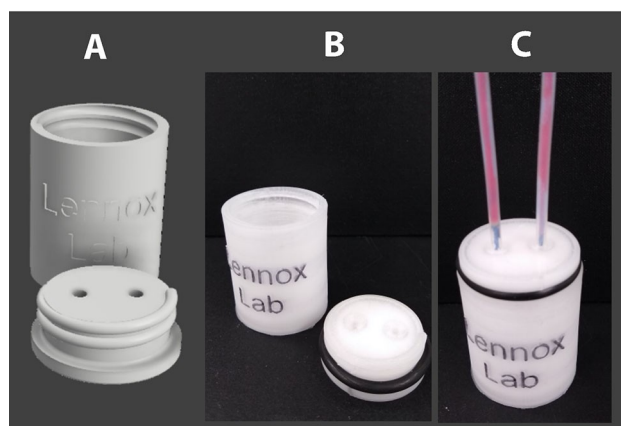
A) CAD drawing; B) and C) 3D printed undivided cell
